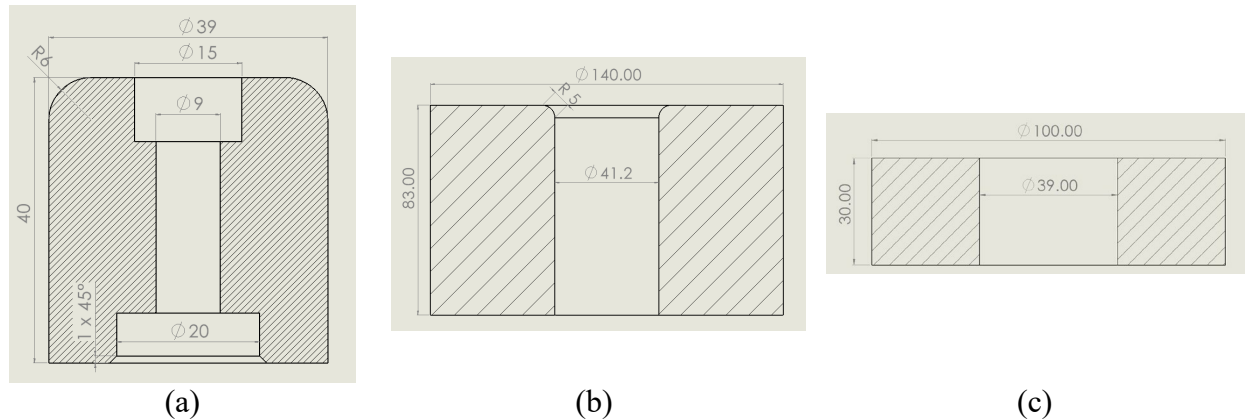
Geometry of punch (a), forming die (b) and blank holder (c)
